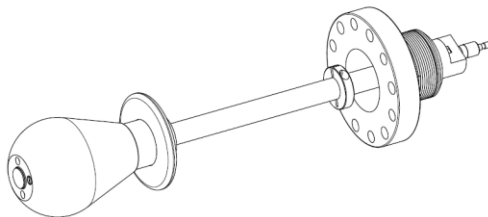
Follow the instructions of Fig 39 to Fig 48 backwards to reassemble the wobblestick. Refer to chapter 6.1 & 6.2 to align the preload & magnets correctly.
